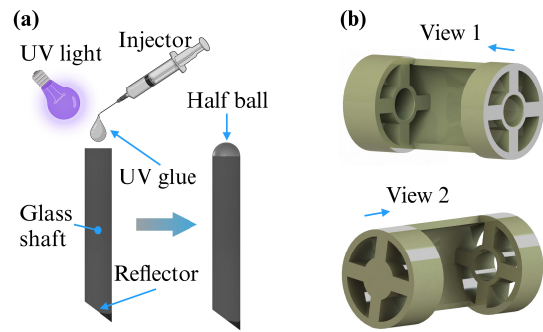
Spindle and bearing designs. (a) Fabrication procedure of the spindle. (b) Drawings of the bearing from two perspectives.
